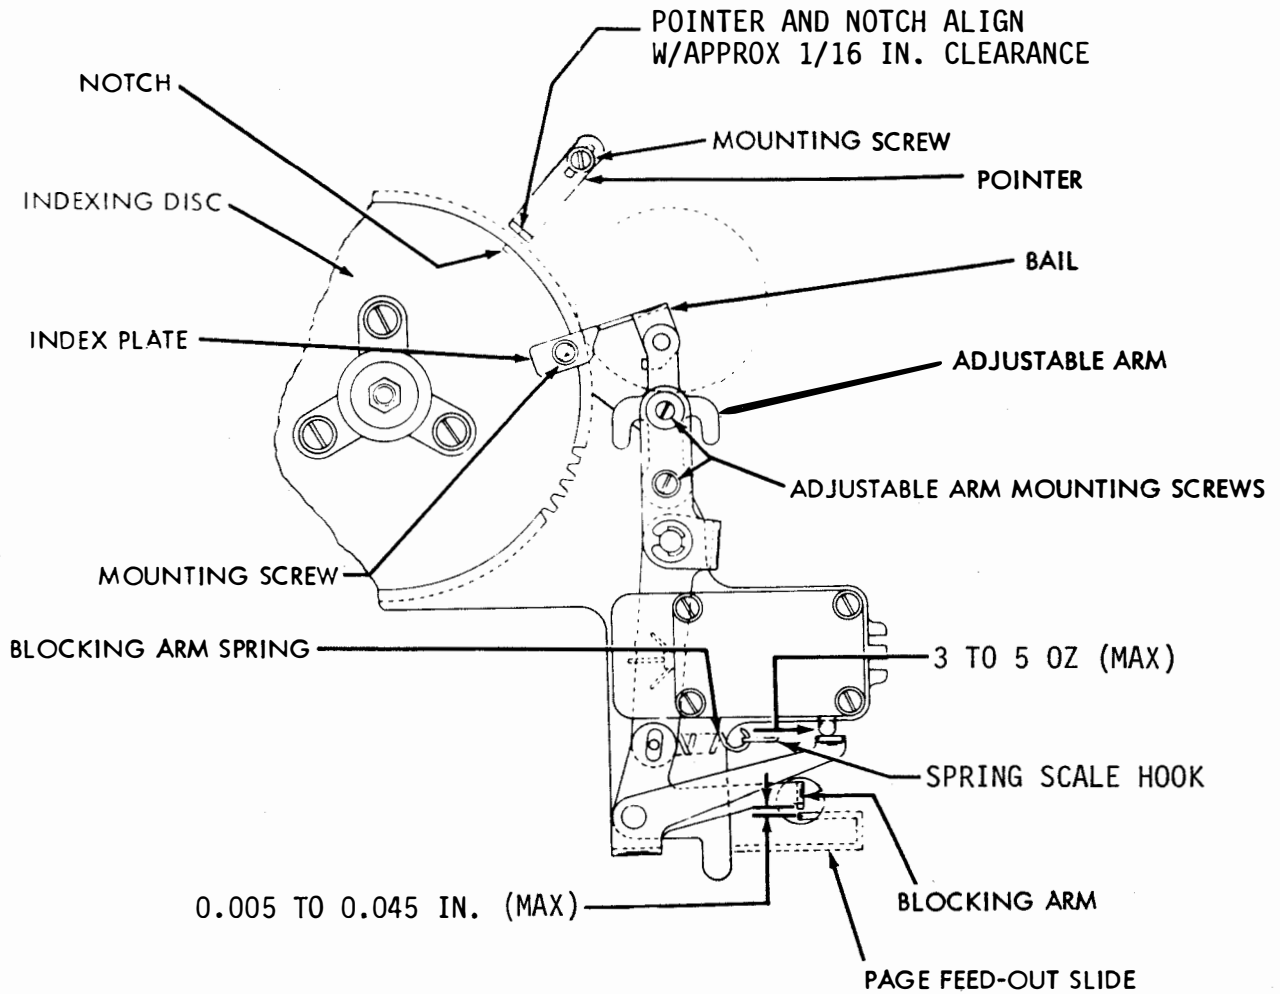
Pointer, Blocking Arm, and Blocking Arm Spring, Left Side View
